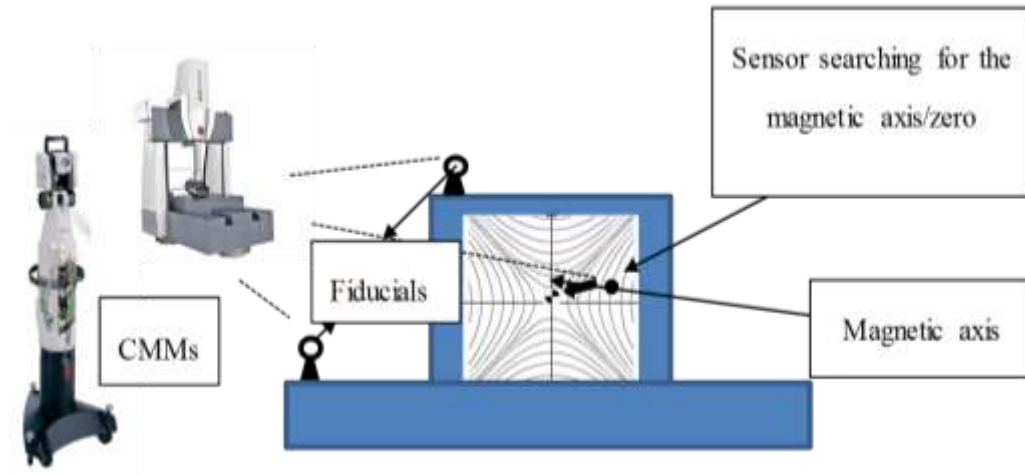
Schematic of magnet assembly cross-section. Measurement of electromagnetic axis with respect to fiducials (pre-alignment) in quadrupole magnet
